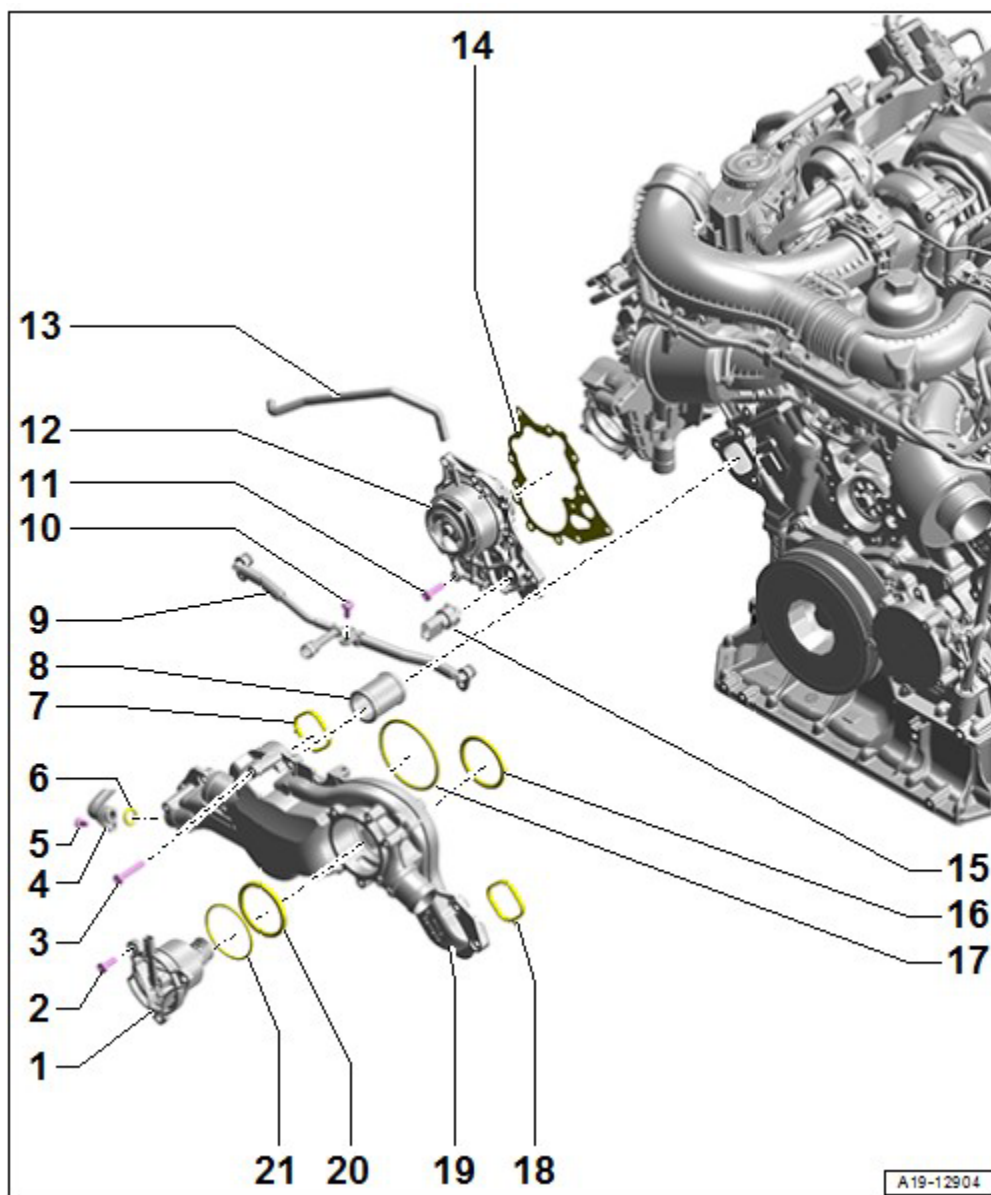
Assembly overview – coolant pump/thermostat incl. switchable mechanical coolant pump, number 12.
